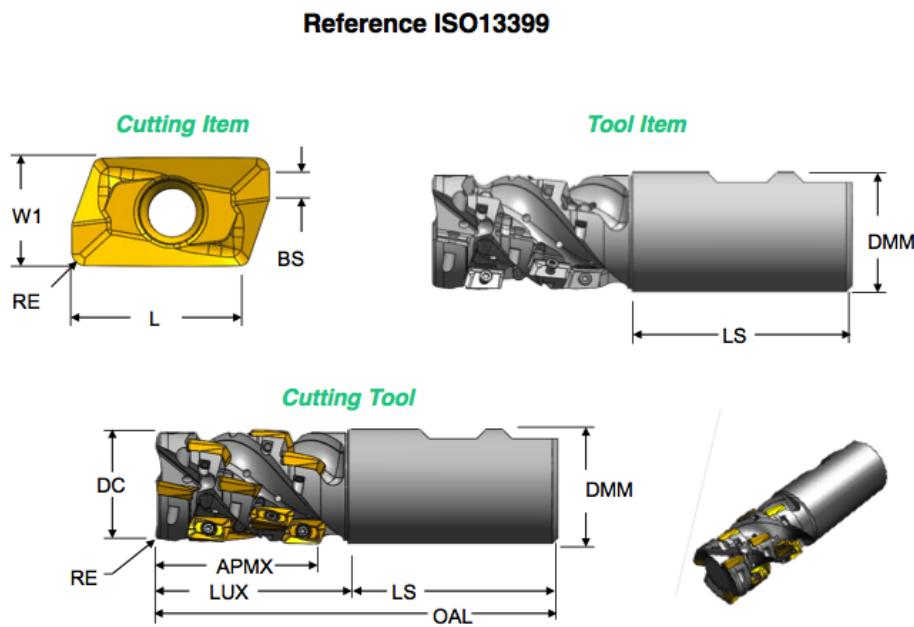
Cutting Tool, Tool Item, and Cutting Item
